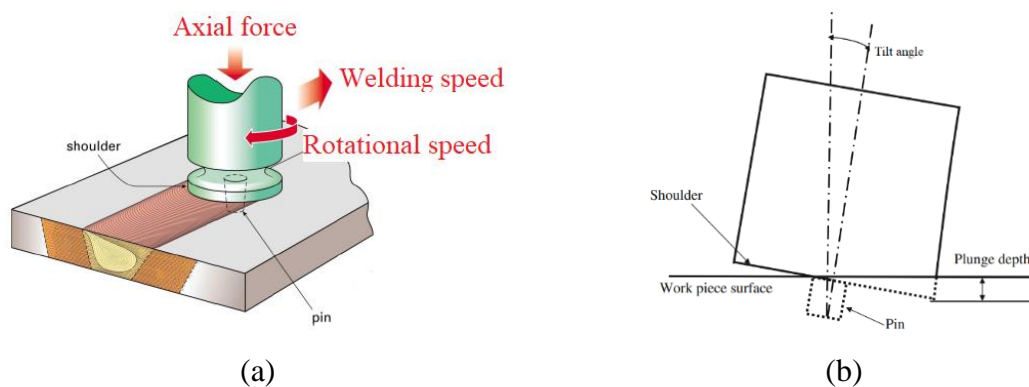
Schematic illustration of: (a) rotational speed, welding speed and axial force, adapted from [53] and (b) plunge depth and tilt angle, adapted from [54].
